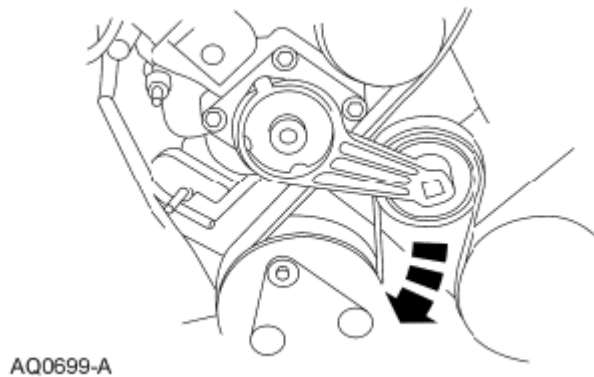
Installing Accessory Drive Belt Onto Crankshaft Pulley
